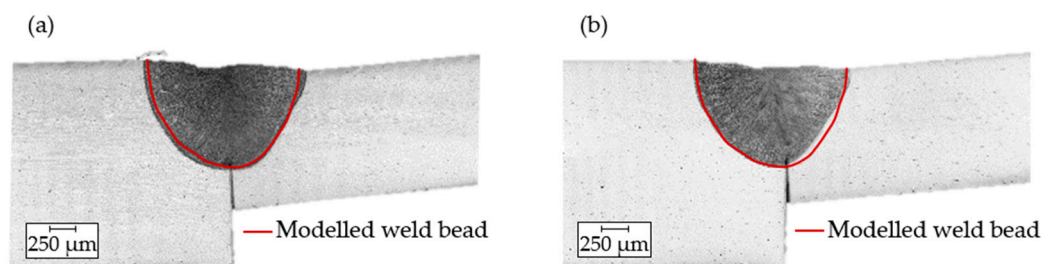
The weld bead dimension validation of test 2: (a) cross-section 1 situated at a 20 mm distance from the weld beginning, (b) cross-section 2 situated at a 50 mm distance from the weld beginning.
